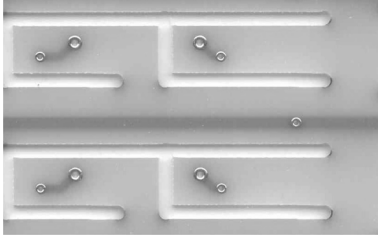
Expanded view of part of the PCB, in the region of some solder pads.
